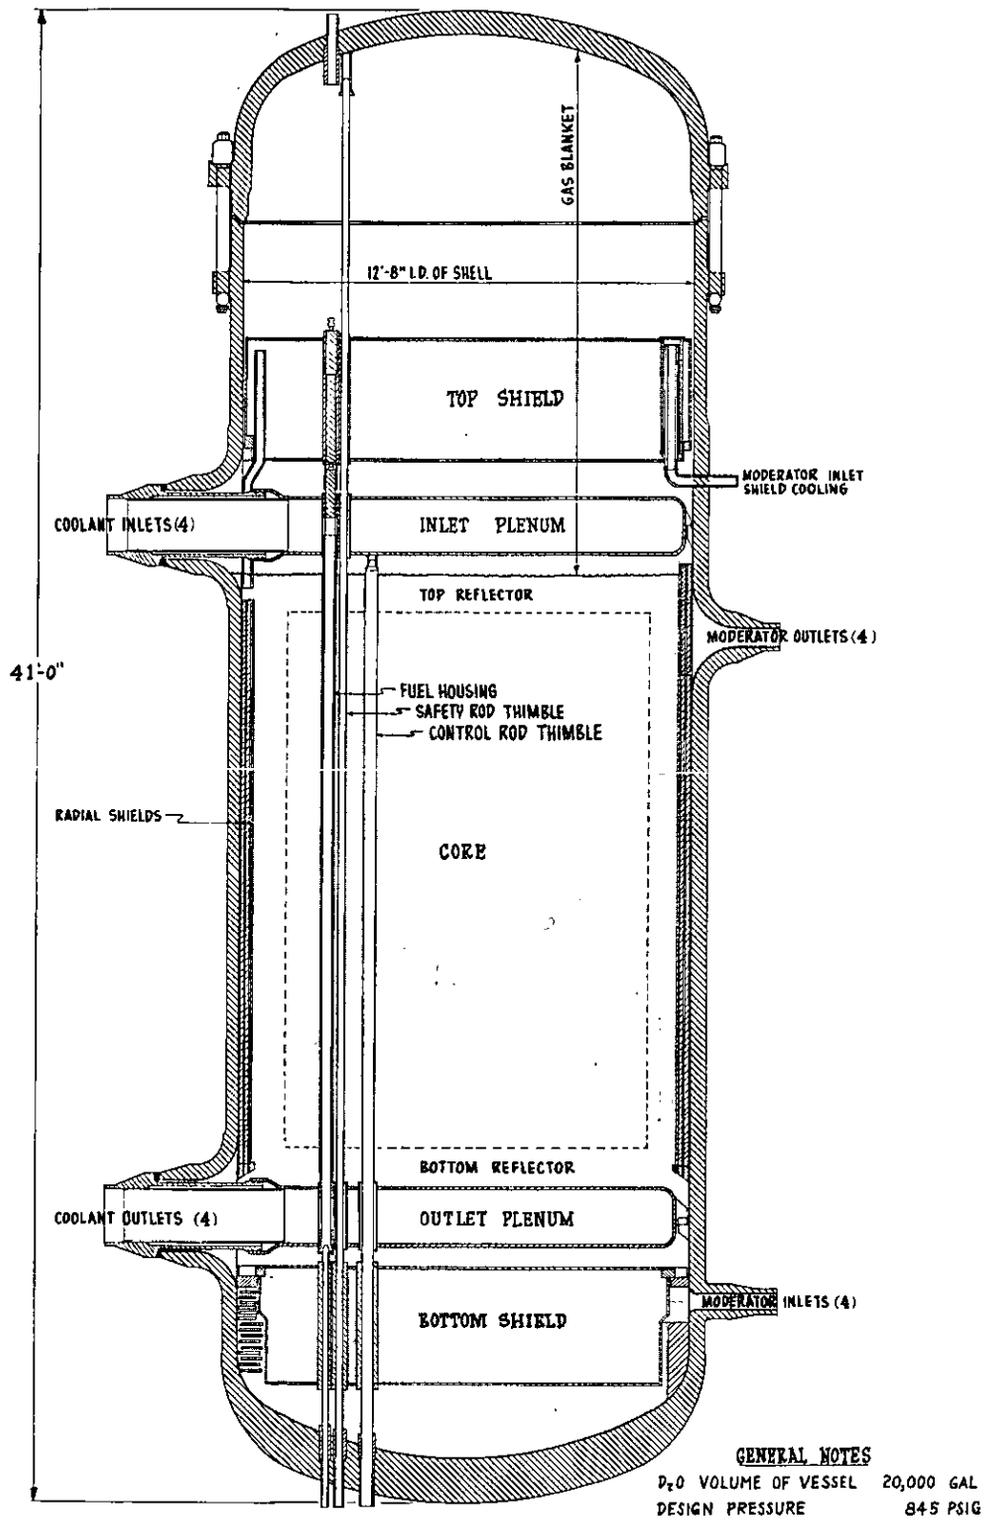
PRESSURE VESSEL REACTOR - LIQUID D_2O COOLED - COLD MODERATOR
